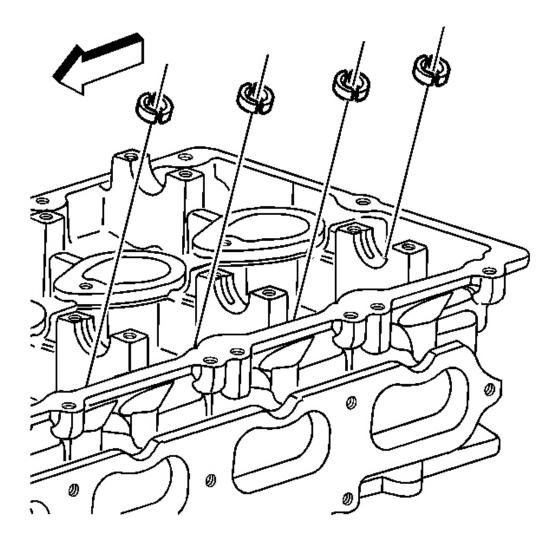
View Of Valve Keys Courtesy of GENERAL MOTORS CORP.
